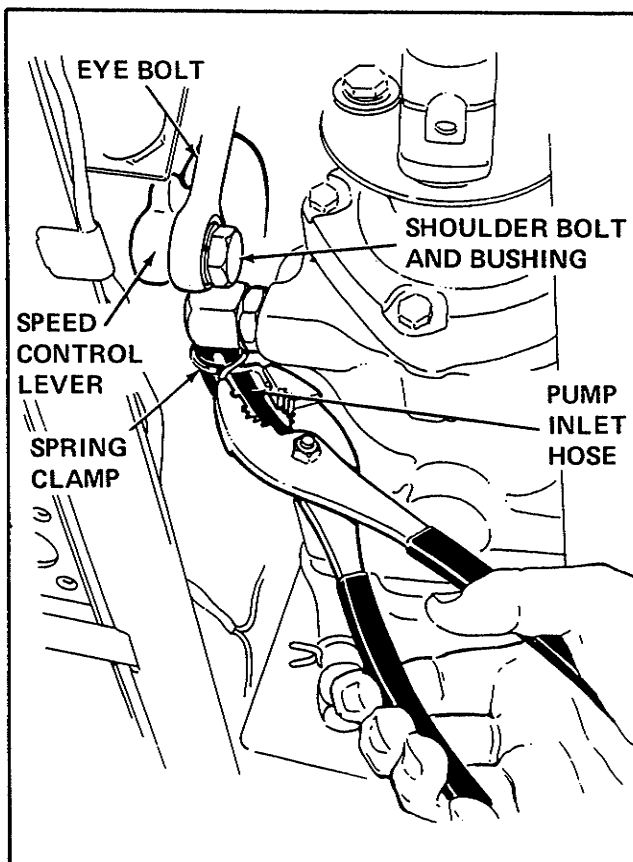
Disconnecting Pump Inlet Hose and Speed Control Lever
